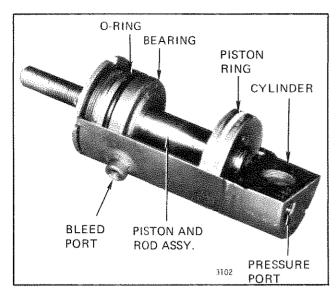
REPAIR OF HYDRAULIC BRAKE CYLINDER, POWER CONTROLLED WINCH
